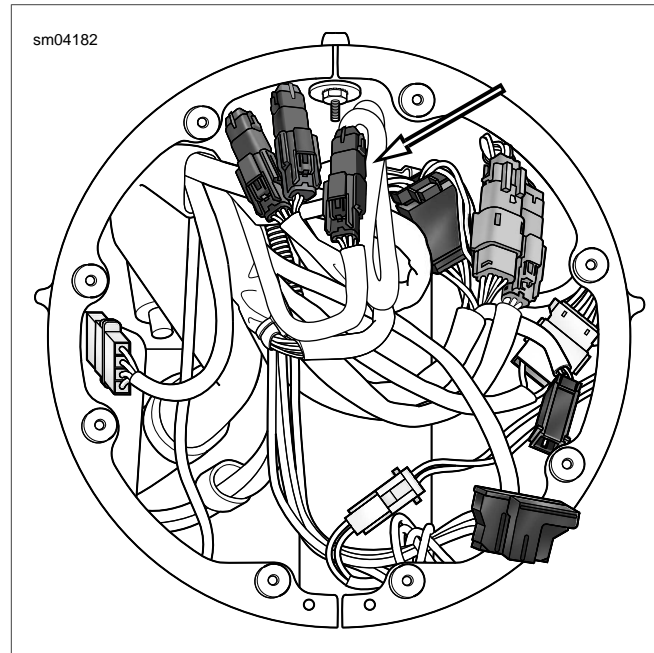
Twist Grip Sensor Jumper Harness Connector (FLHR/C)
